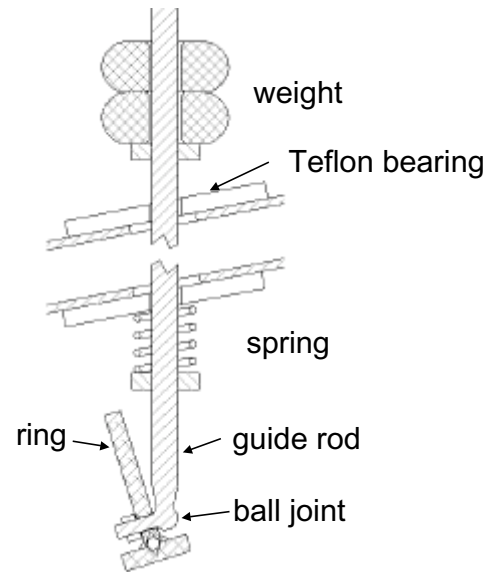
Attachment of the ring to the frame using guide rods that slip through bearings in the frame.
